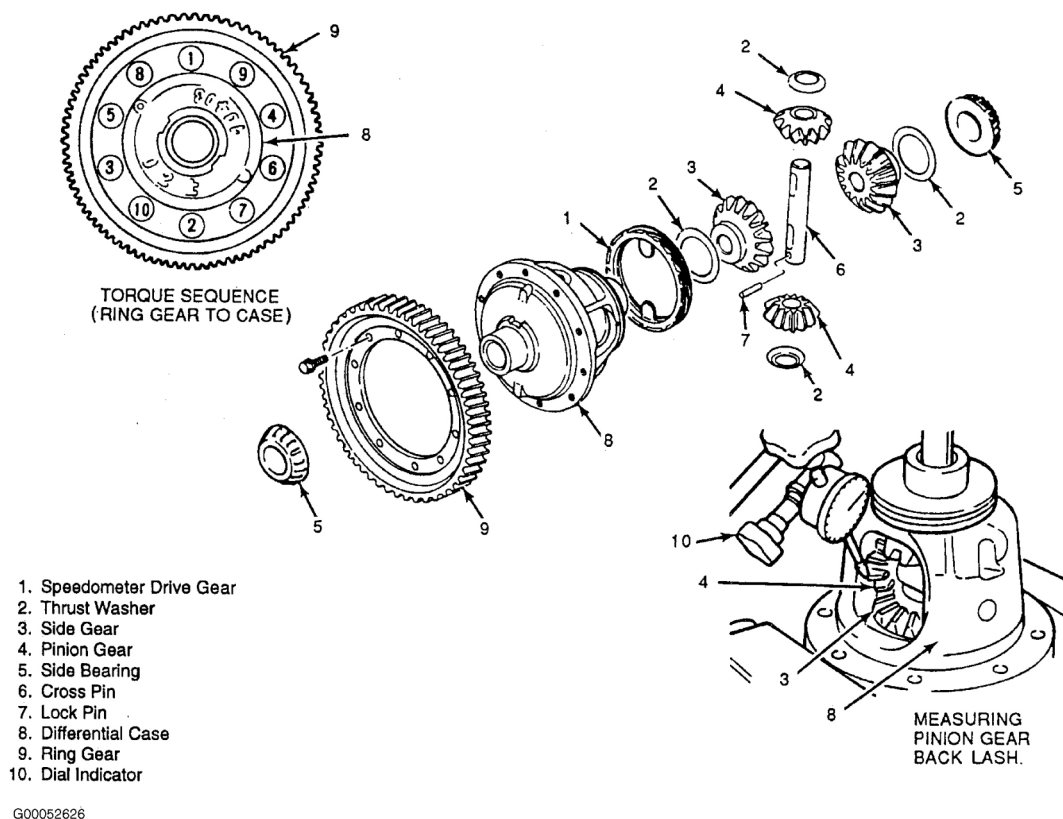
Exploded View Of Differential Measuring Backlash & Torque Sequence
